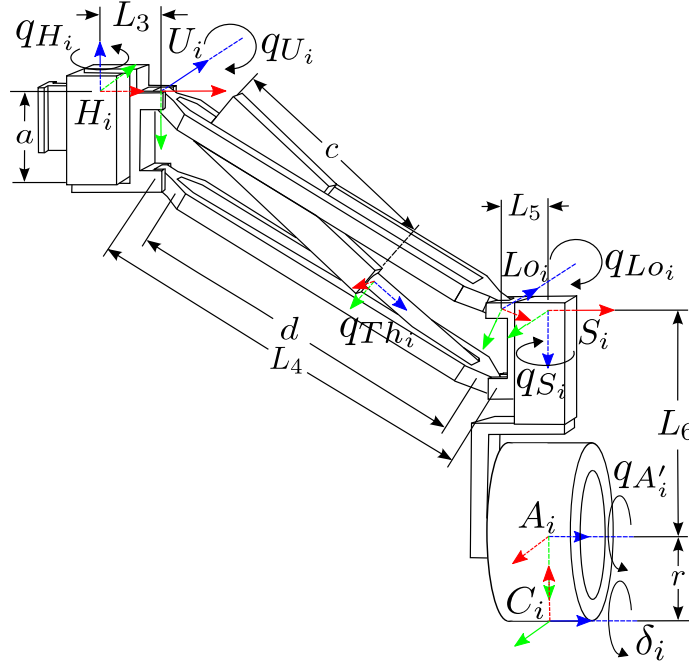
Labeled view of the MAMMOTH rover leg i showing its coordinate frames, dimensions and joint angular position variables.
